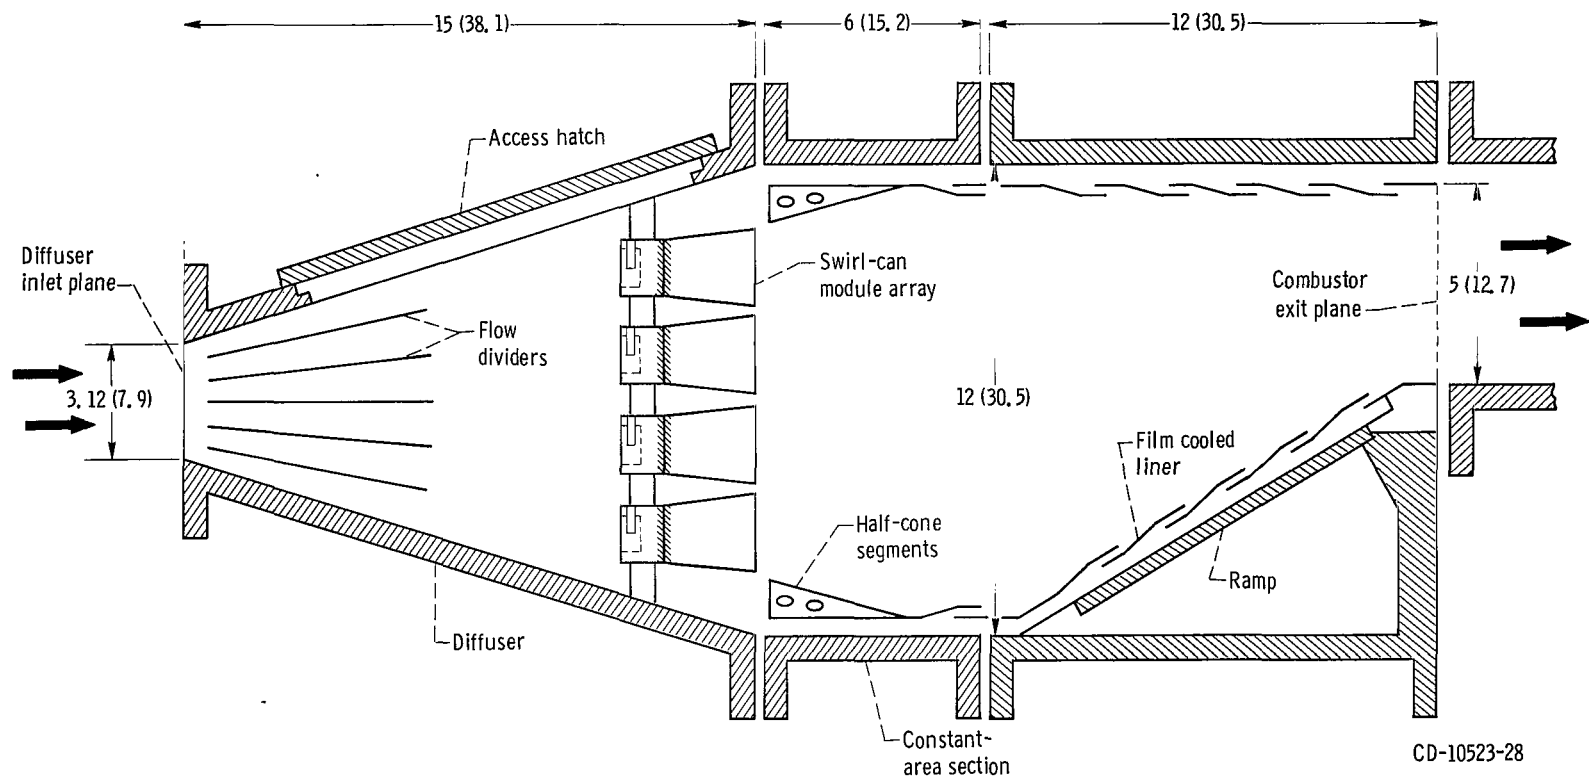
Combustor installation in test section. Dimensions are in inches (cm).
